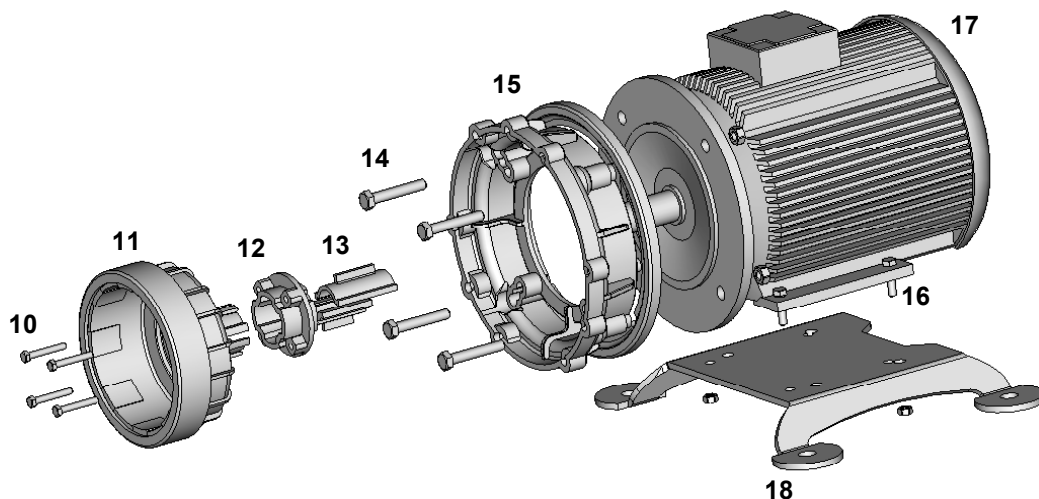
A – disassembling sequence MOTOR PARTS
